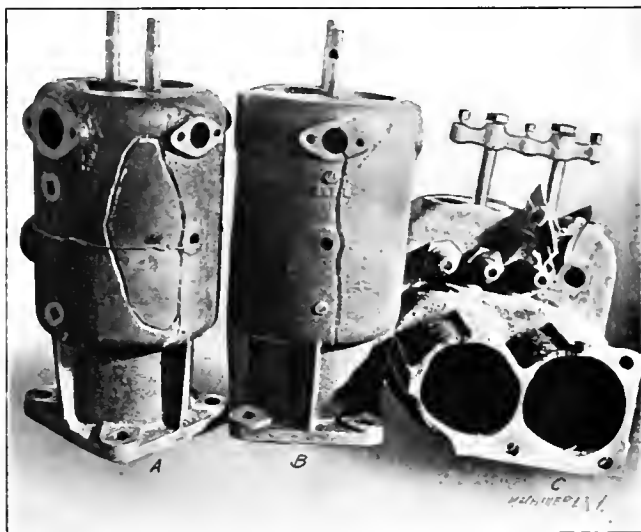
Two Cylinders with Cracked Water Jackets prepared for Welding. Twin Cylinders with Broken Flanges to be Welded.
